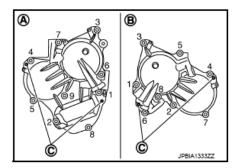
Intake Valve Timing Control Covers Bolt Tightening Sequence And Dowel Pin Locations
